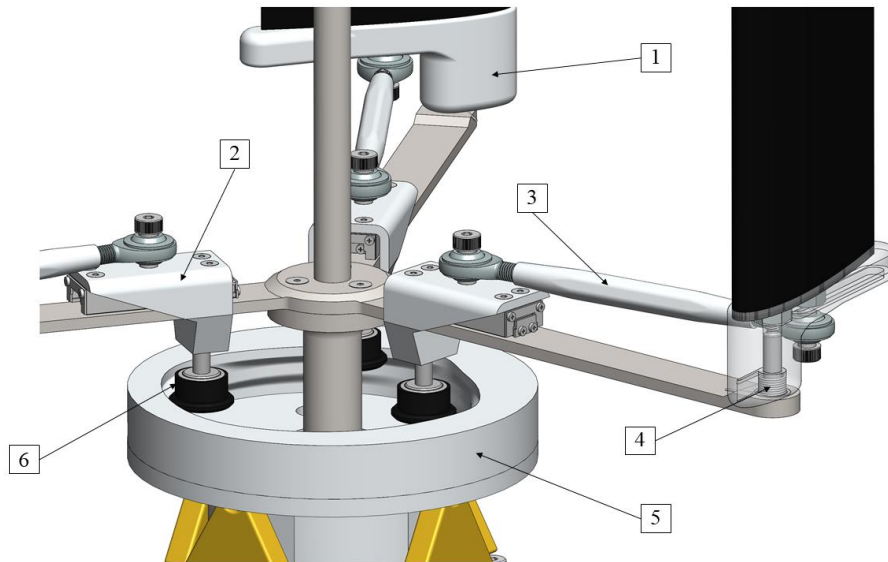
Rotor Cap (1) Linear Slide bearing System (2) Pitch Control Linkage (3) Torsion Spring (4) Cam (5) Cam Roller Bearing (6)
